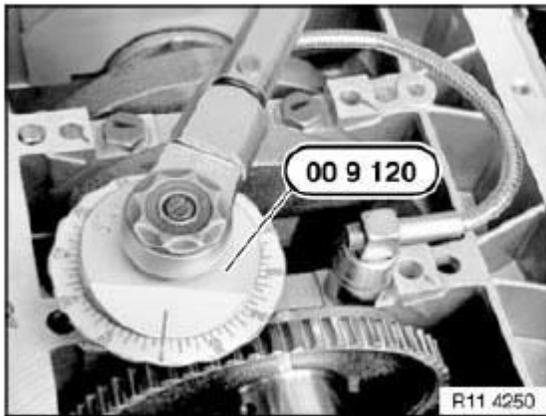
Tightening Main Bearing Bolts Using Special Tool (00 9 120)
